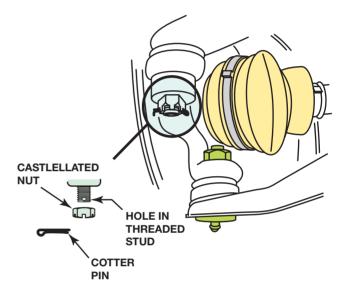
A castellated nut is locked in place with a cotter pin.
